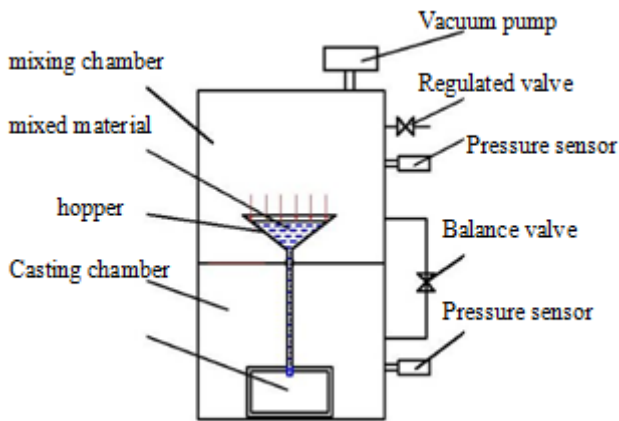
Simplified Model of V450N-VD Vacuum Casting Machine
